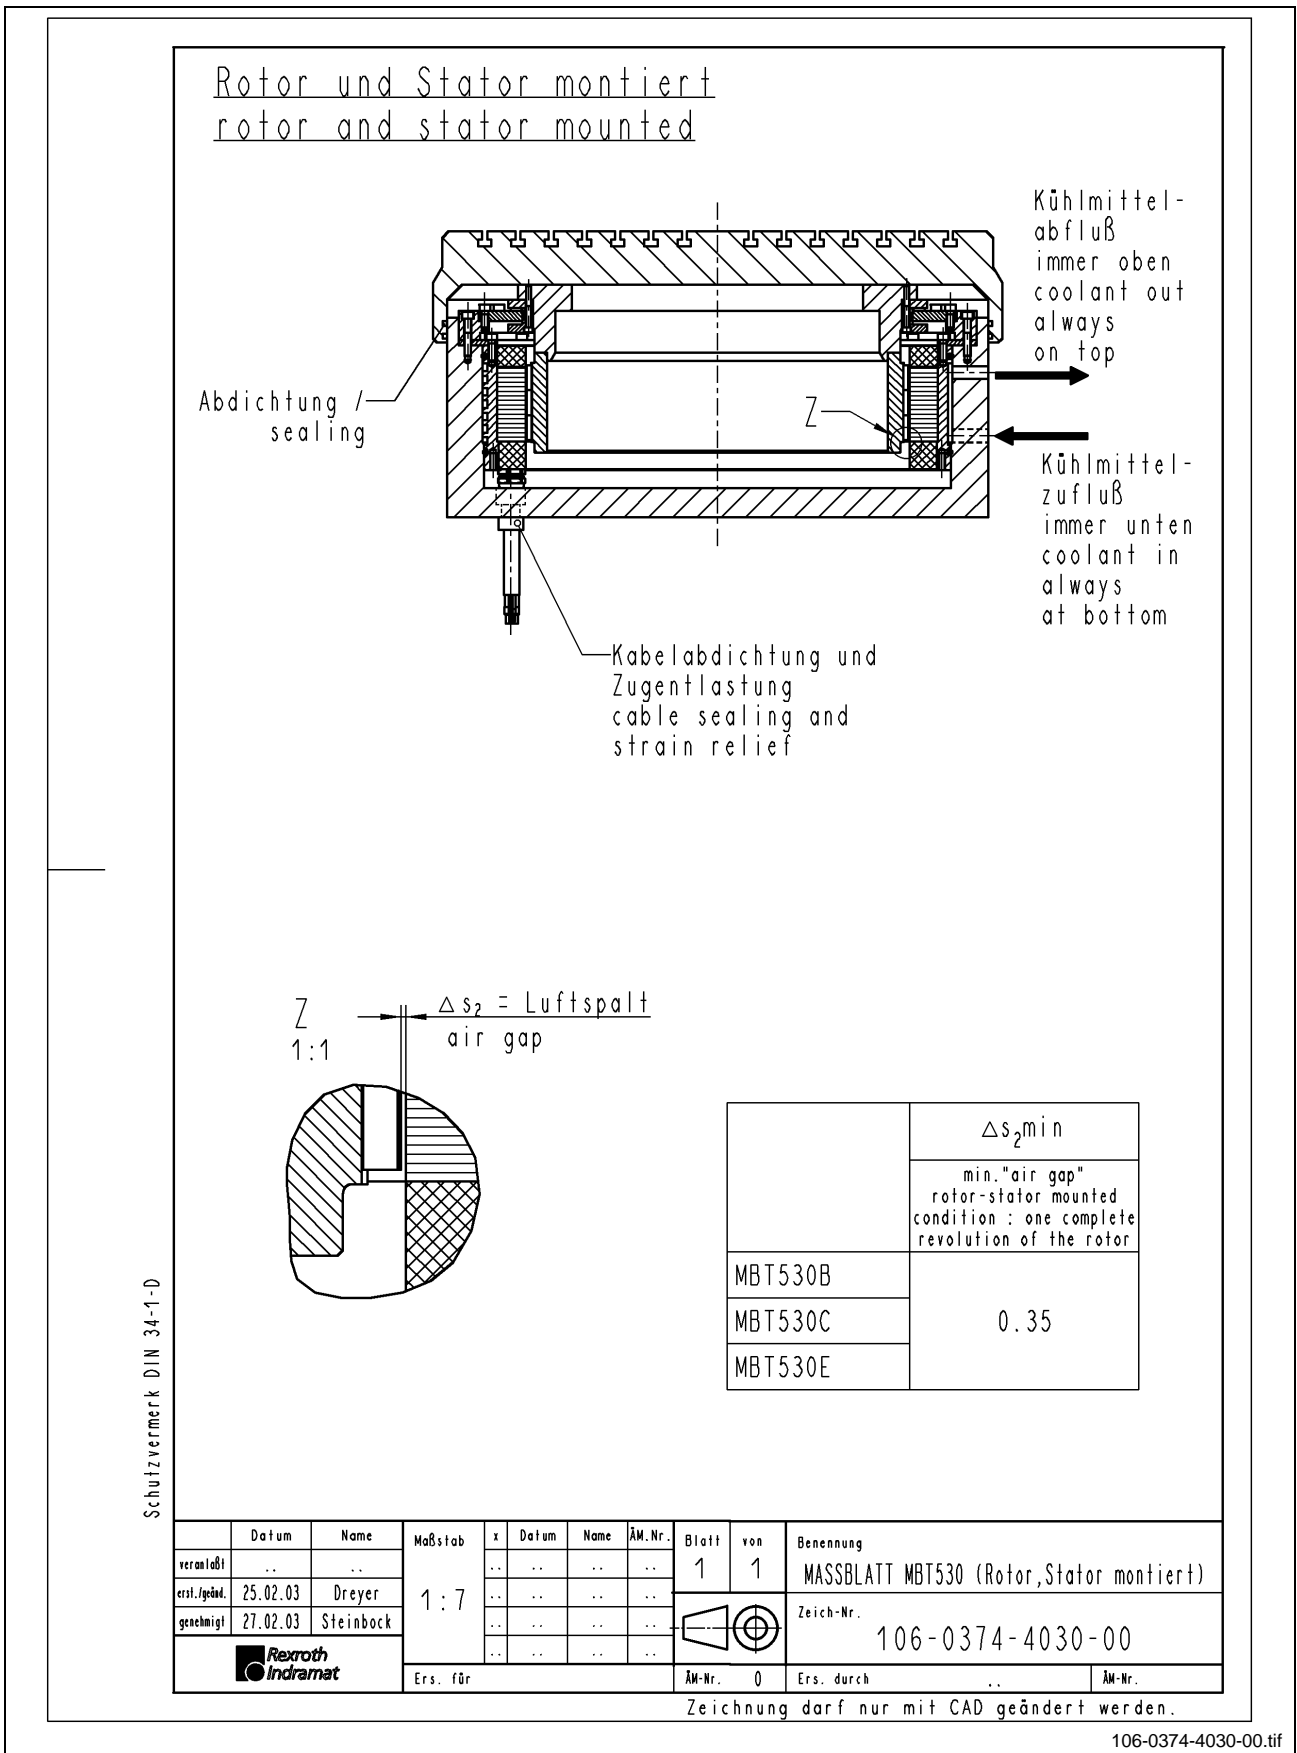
Dimension sheet size 530, Rotor and Stator, mounted
